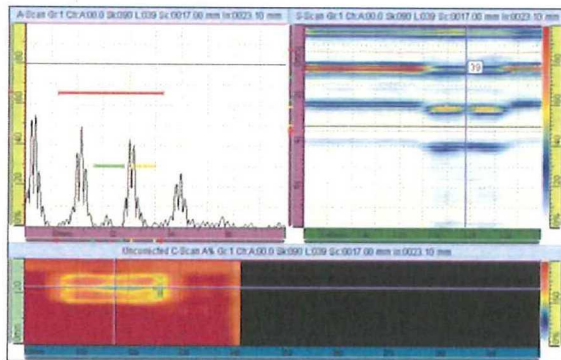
PA scan of USW141017-04 which is welded with 600 [J]. The A, S, and C-scan show that the two ED strips have melted and formed two proper welds. However, the flow fronts did not merge yet.
